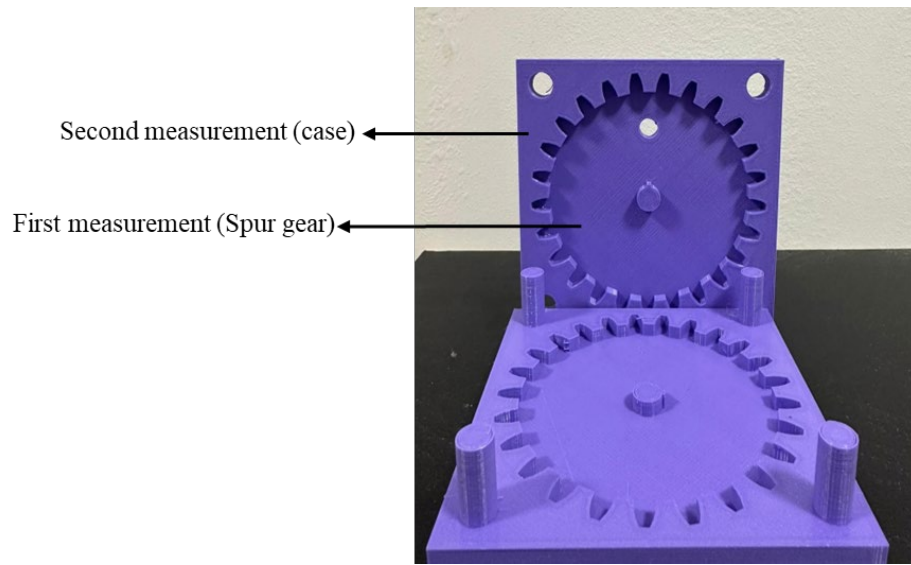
FFF assembly of printed gear mold for ultrasound testing purposes.
